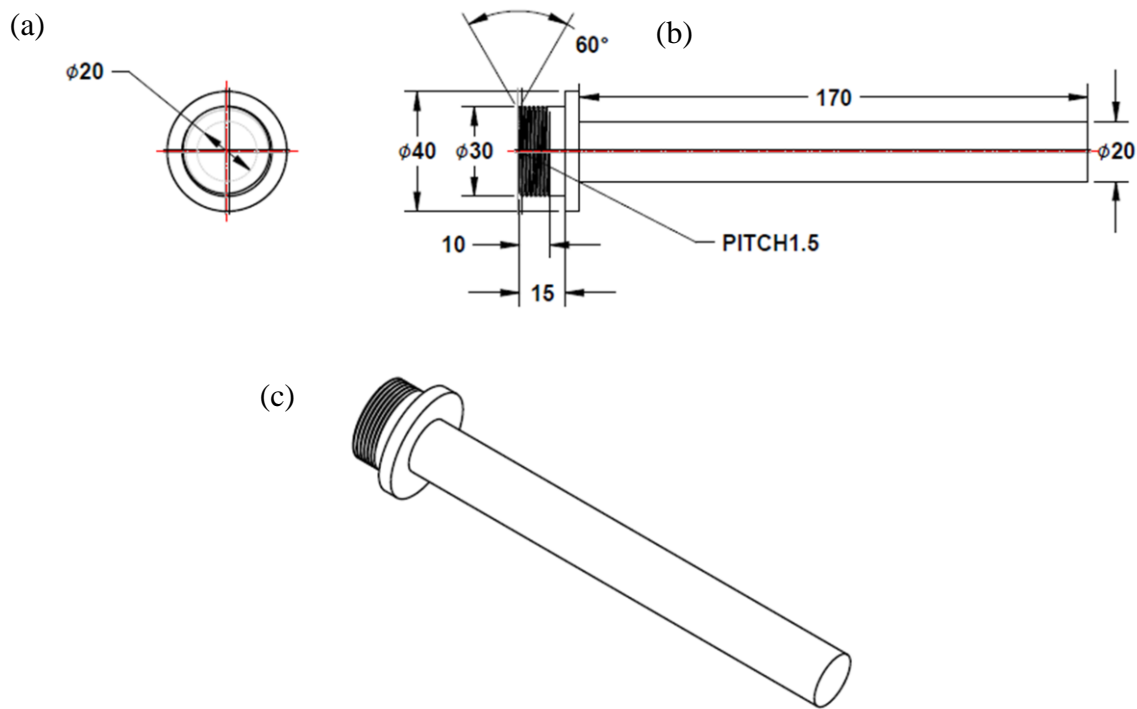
2D drawing of the (a) projected front view, (b) projected side view and (c) three-dimensional CAD model of the shaft for workpiece holder (all dimensions in mm).
